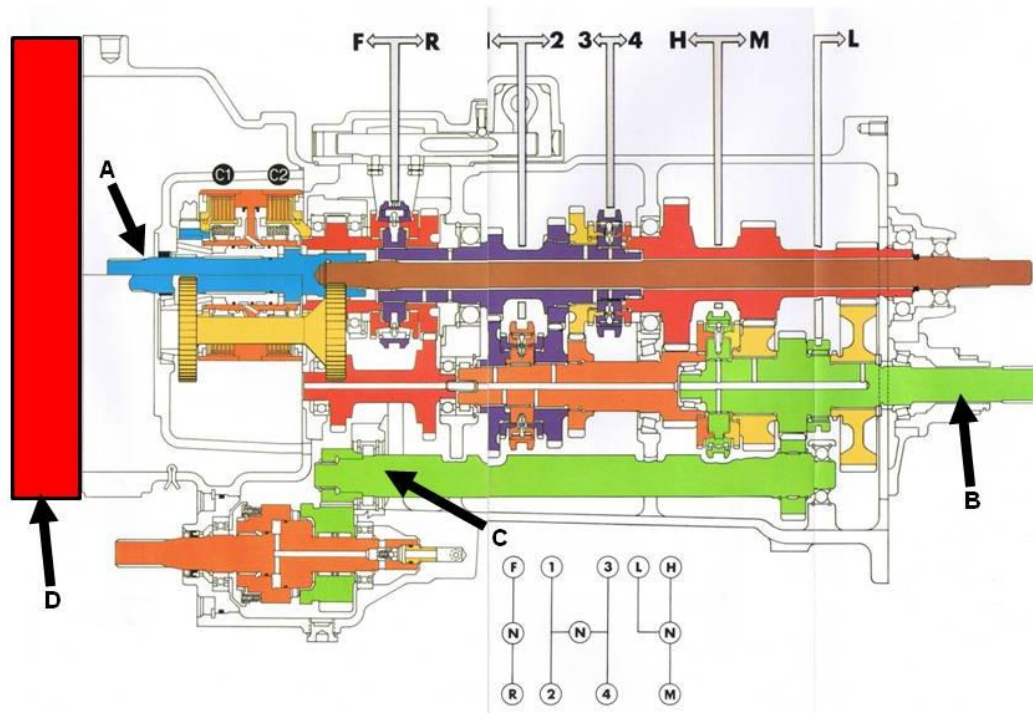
Schematic drawing of the main gearbox of the TS90. Torductor torque sensors were fitted at the input to the gearbox (A), output to the rear axle (B) and output to the front axle (C). Oxford TS180 shaft speed sensors were also fitted at locations B and C. The location of the extension plate (Figure 3.3) is shown at D. (Adapted from: CNH, 1998)
